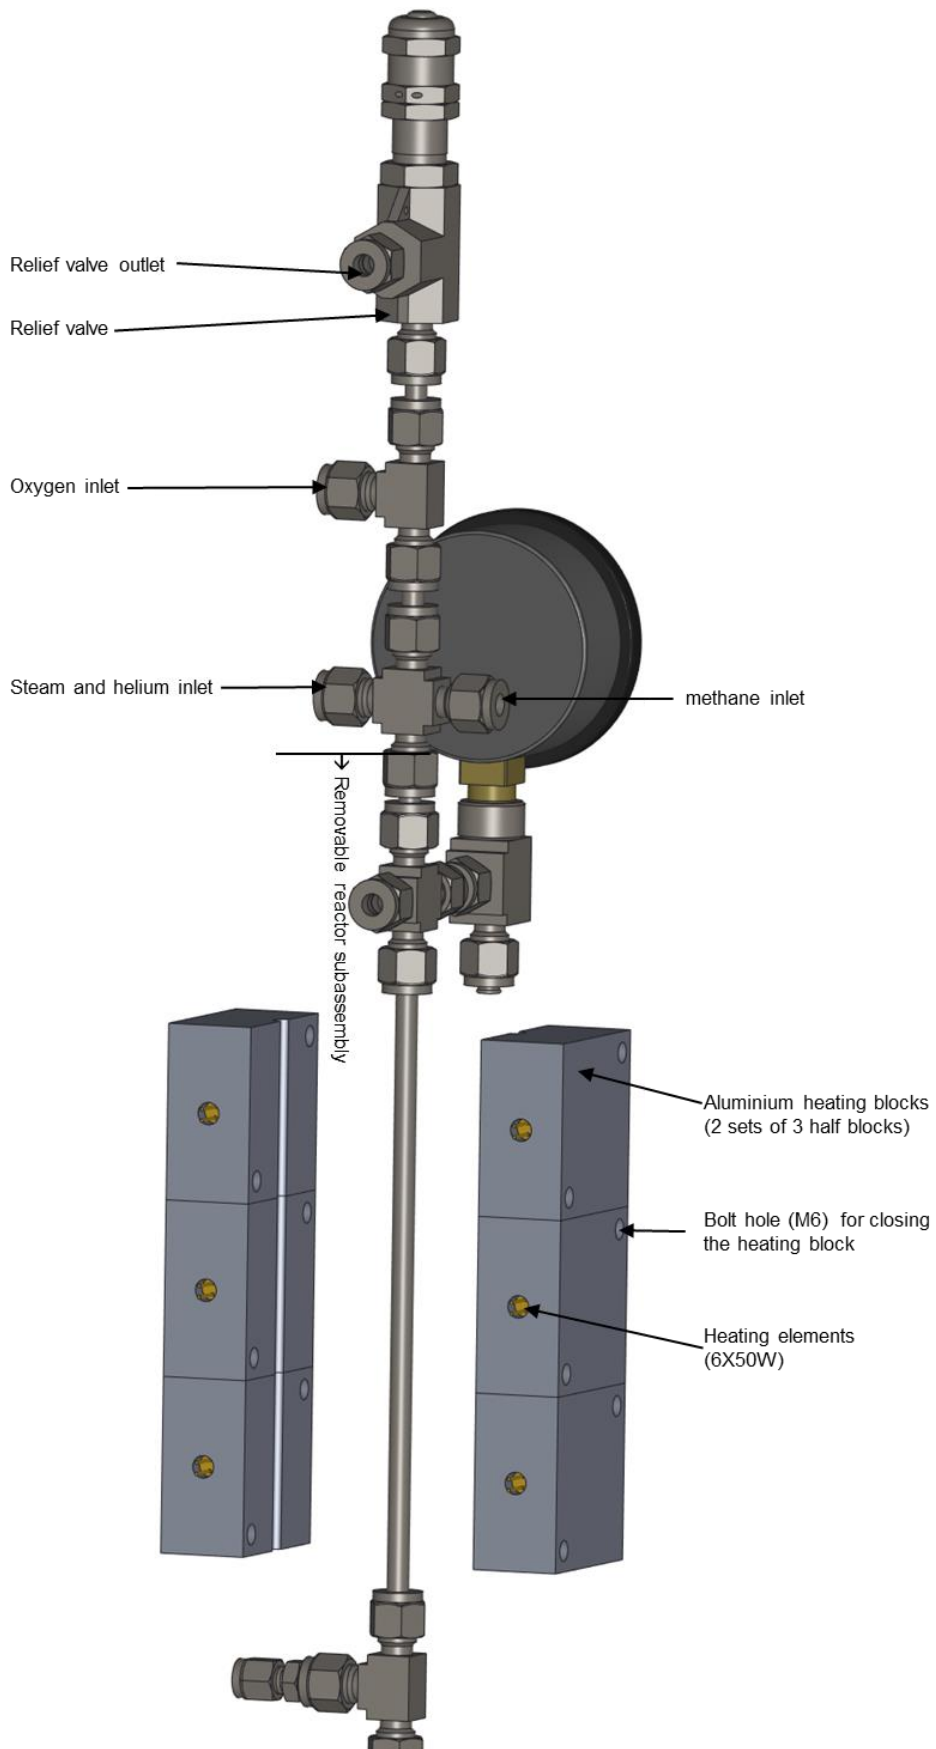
3D model of R-501 with annotation for reactor top section and heating block arrangement (reactor bottom section partial omitted)
